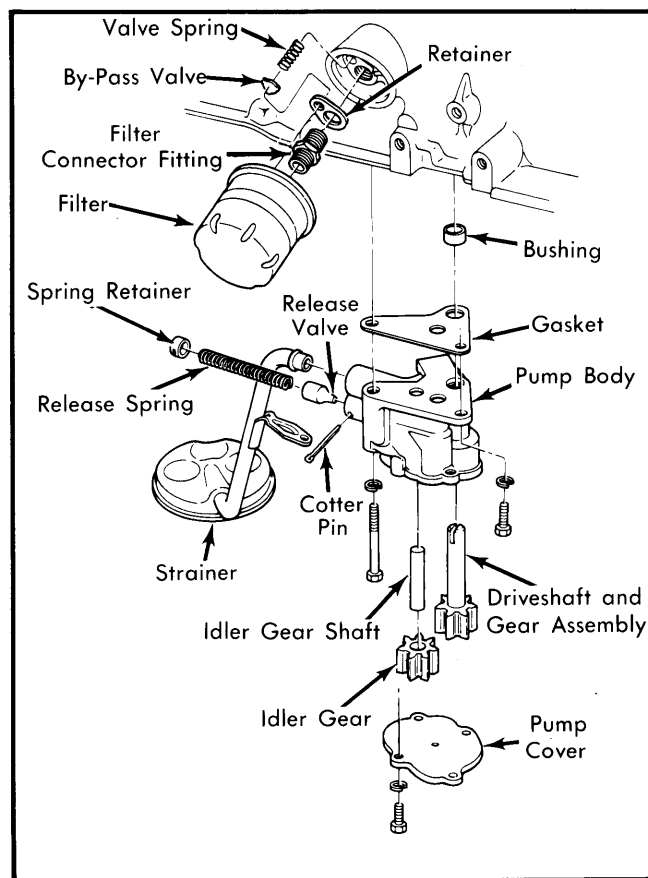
Exploded View of Oil Pump and Oil Filter Assembly
